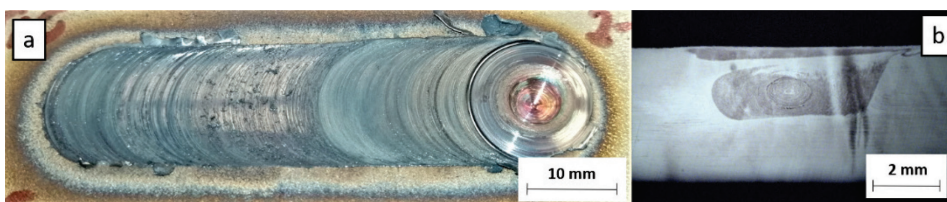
Image of the visually macroscopic defect-free weld of stainless steel (a) and cross section of the same weld (b).
